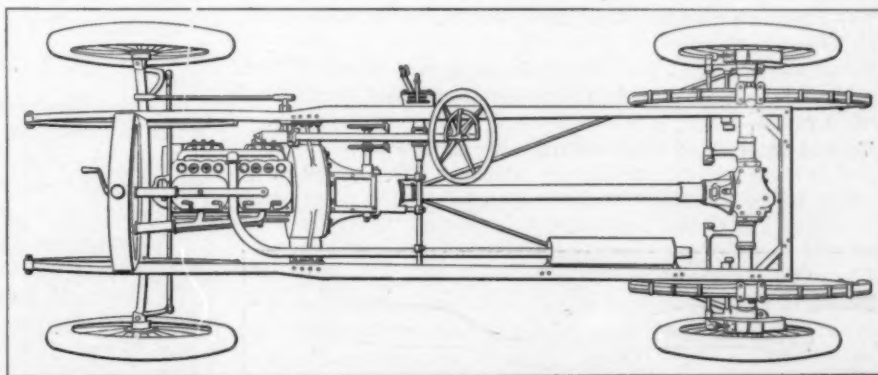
Plan of the chassis showing the 35-horsepower unit type of motor resting on the sidebars
